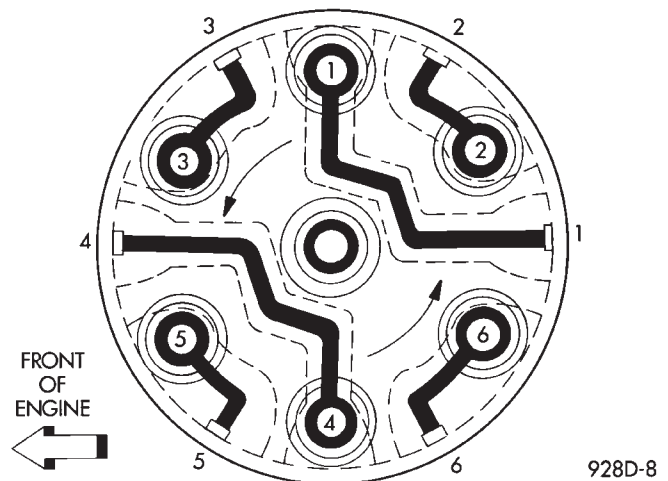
Distributor Cap Terminal Routing, View from Top of Cap
